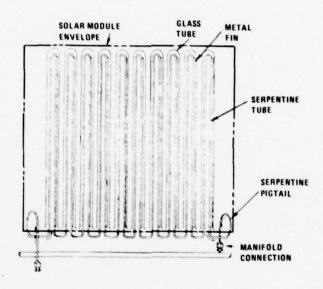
Serpentine Heat Exchanger Assembly [4]
